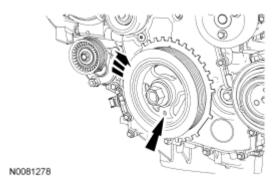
Identifying Hole In Crankshaft Pulley In 6 O'Clock Position
